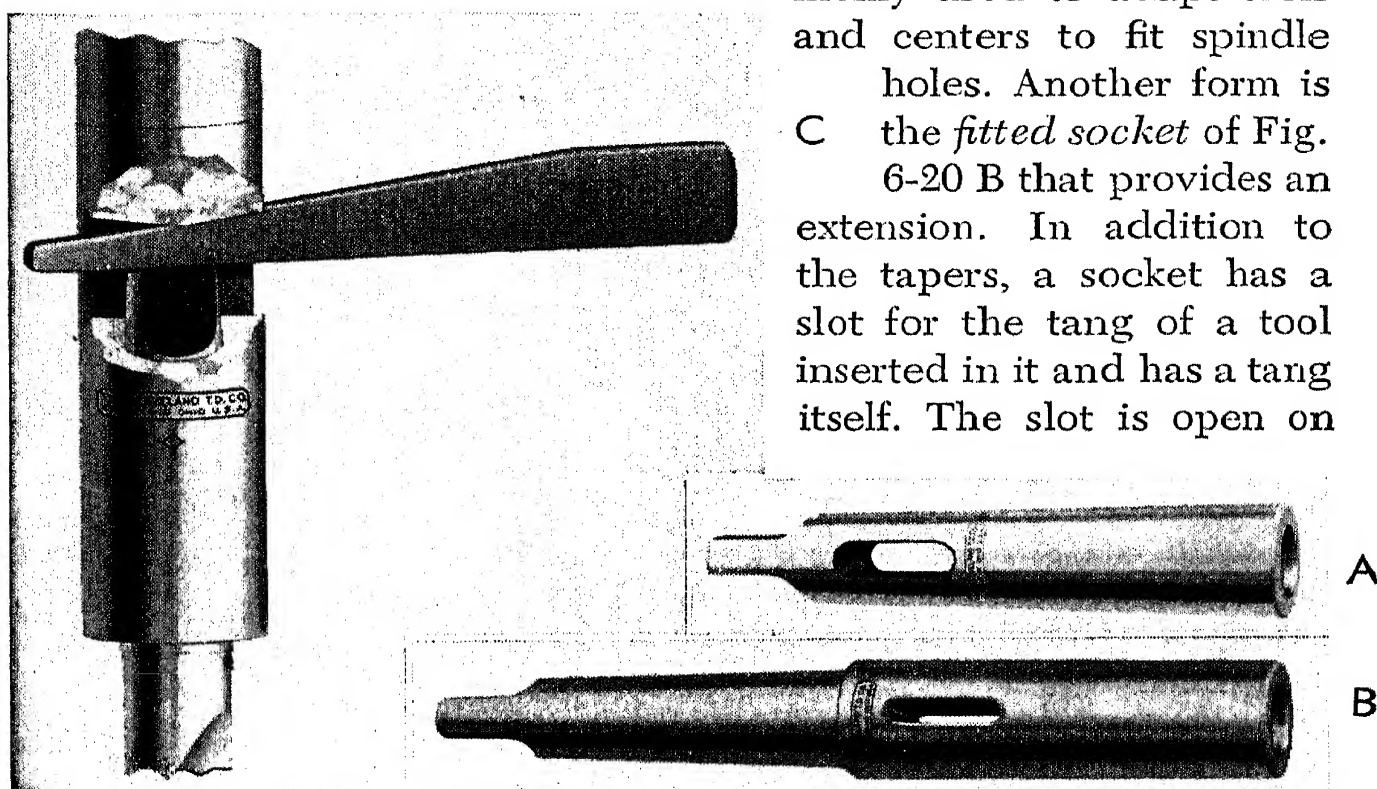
Taper shank sockets. A. A sleeve or shell socket. B. A fitted socket. C. Use of a drift to remove a tapered shank. (Courtesy Cleveland Twist Drill Co.).
